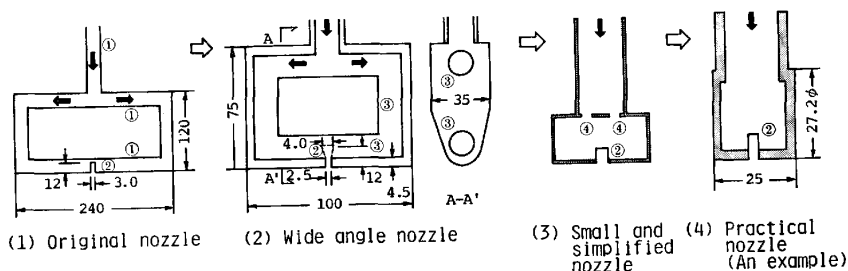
The technological thoughts to develop new nozzles for the secondary cooling of continuous casting machine.
